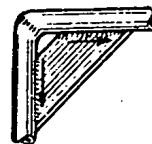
Welding a corner plate with a trimmed corner.
